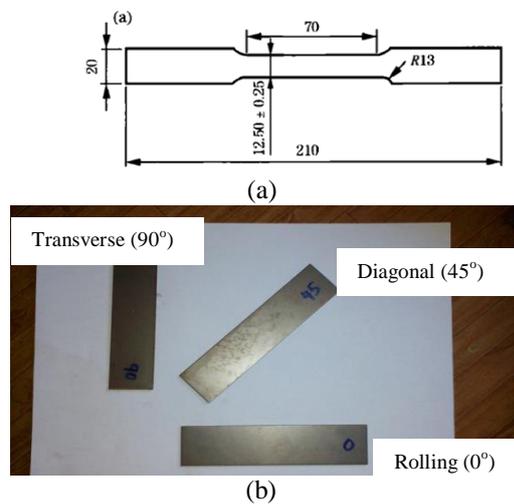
(a) Specimen geometry for ASTM E8 tensile test, and (b) bending test
